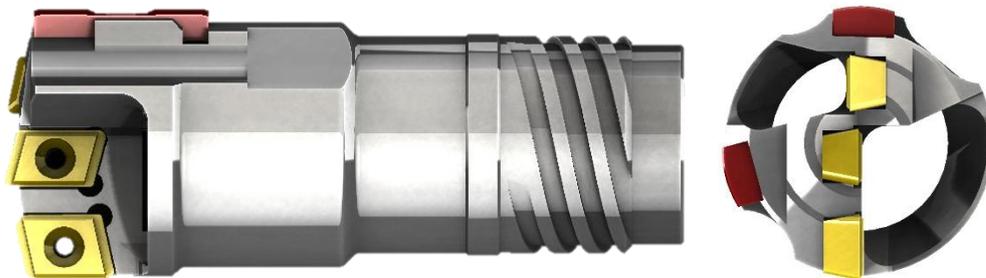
Proposed design of non-adjustable BTA drill head for Master's thesis
